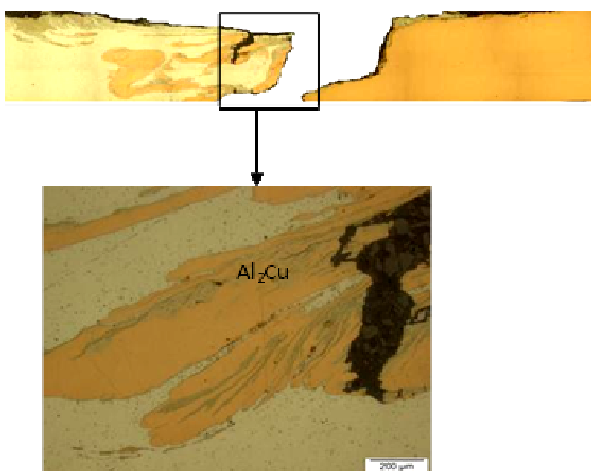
(b) Fractured surface of weld produced at 600 rpm and 50 mm/min with the 15 mm shoulder diameter tool
